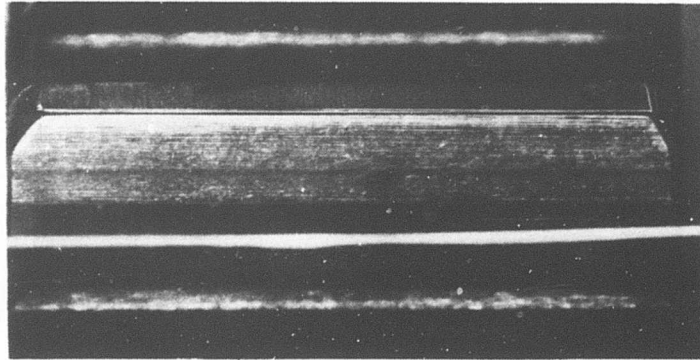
Upper Planetary Gear Following Input Pinion Failure at 90% Torque, $300^{\circ}\pm 5^{\circ}\text{F}$ Sun Gear Side.
